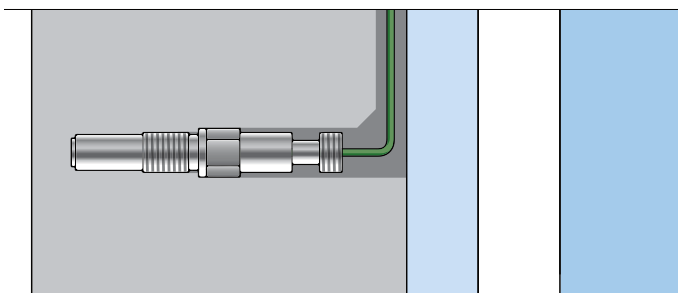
Contact-free measurement: measuring pins capture the mold compression caused by the pressure.
